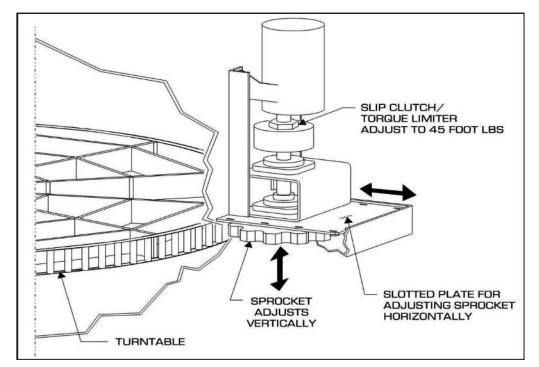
10: Turntable Drive and Turntable: Slip Clutch/Torque Limiter
